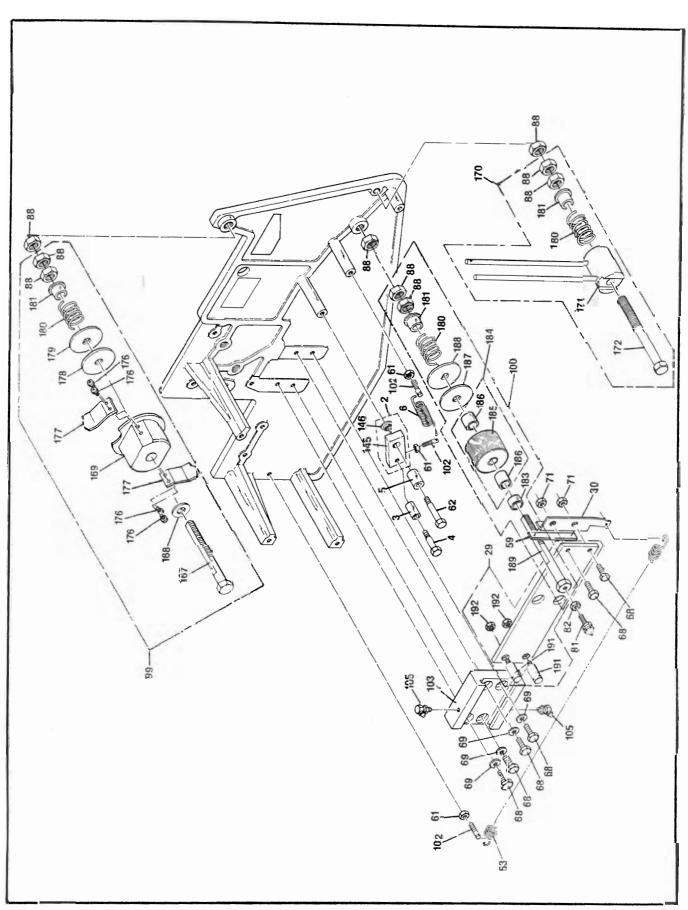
SLIDE - TAPE DRUM & TENSION ROLLER ASSEMBLY Refer to page 22 for Slide - Tape Drum & Tension Roller Assembly Parts List.
